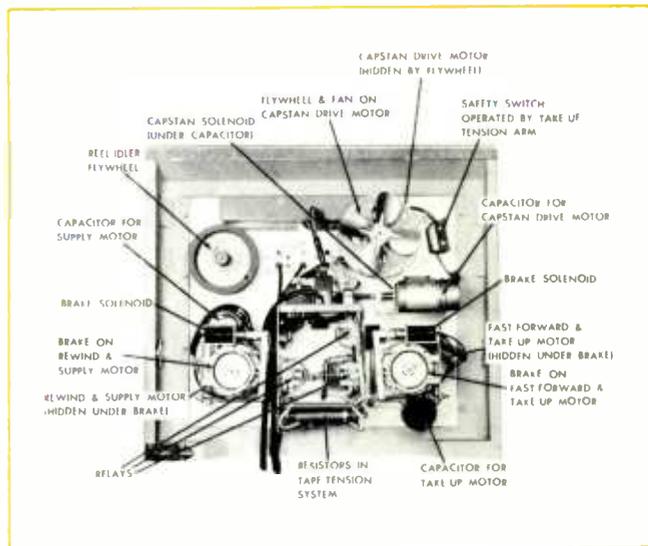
Bottom View of Transport Panel, With Shield Removed.
